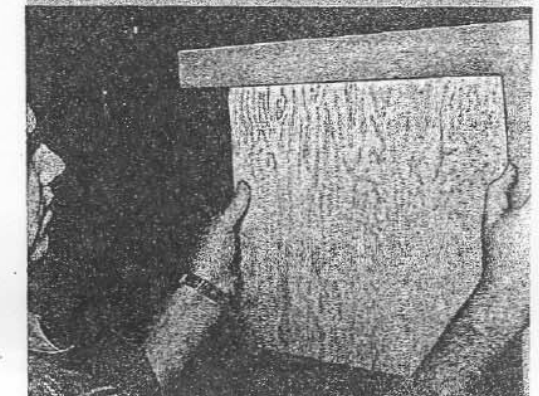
Check your bevel angle with a protractor set bevel gage.
